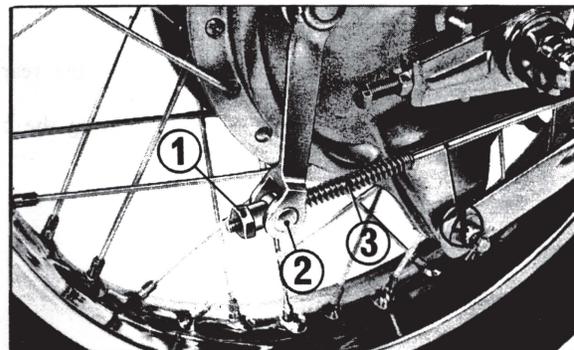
(1) Adjusting nut (3) Brake rod spring
